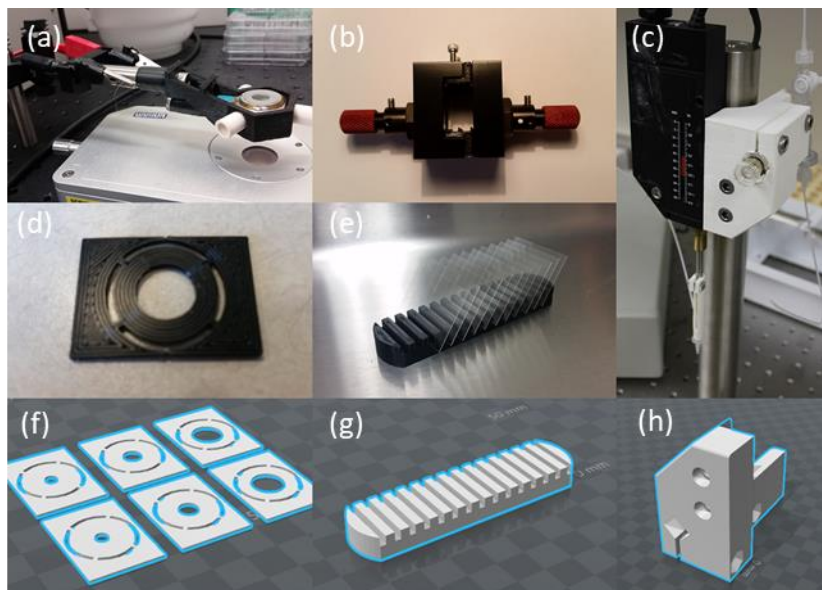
3D printing has been used to engineer several pieces to help develop and optimize processes in this report. (a) Printed attachment to help control the evaporation rate of sessile drops. (b) 3D printed attachments are made to retrofit different linear variable filters with various filter holders (c) 3D printed components to a jig used to extract size-specific fractions after DGU. (d) A mask used in the process outlined in Appendix B5. (e) A glass cover slip holder; (f), (g), and (h) are images of the stereolithography or .stl files used to print (d), (e) and (c), respectively.
